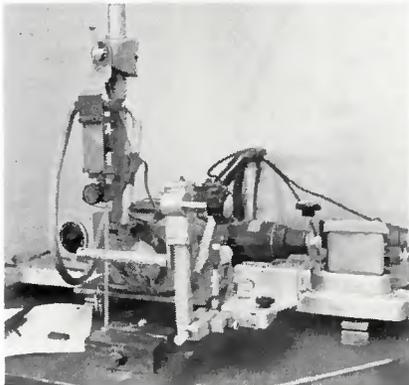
Automatic welding unit for shielded metal-arc deposits showing an implant specimen at the left and the hydrogen determination testpiece assembly directly under the electrode
